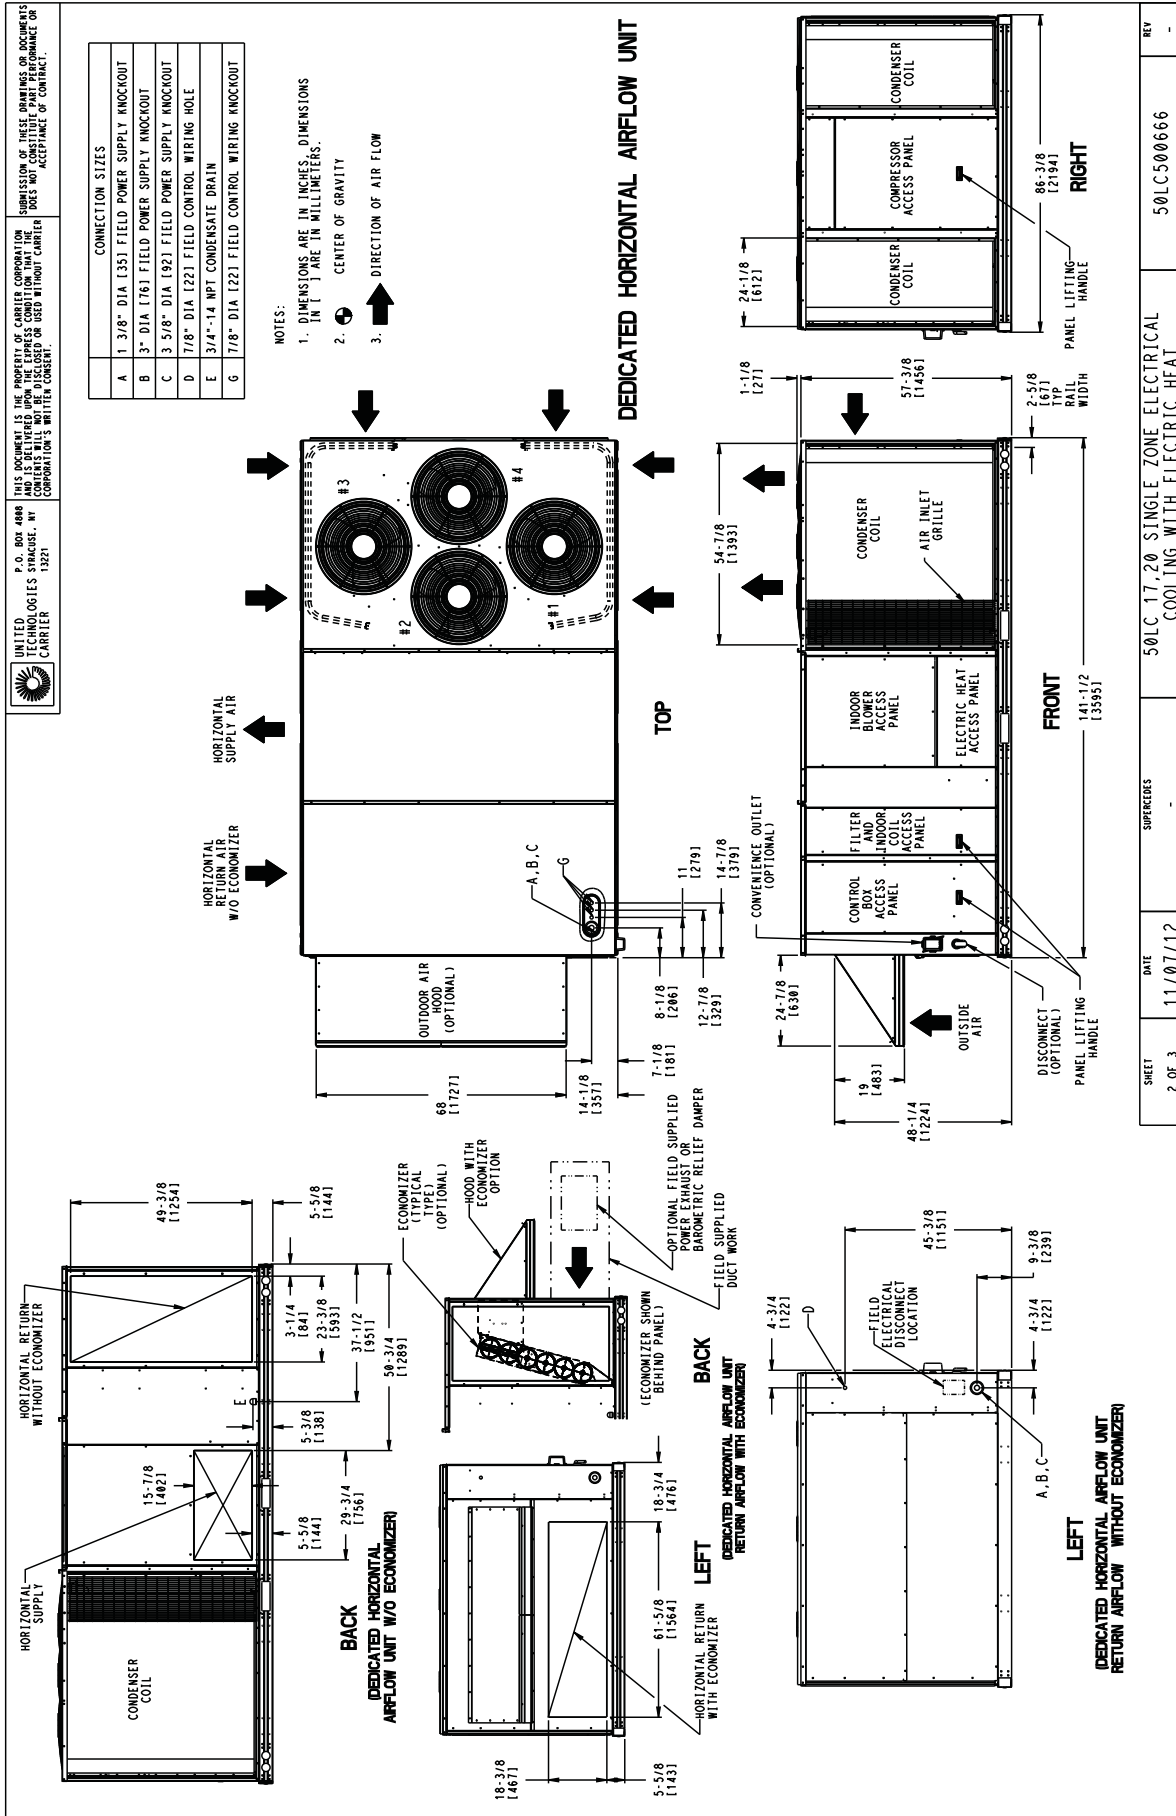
Dimensions 50LC*B17 - 20, Sheet 2 of 3
